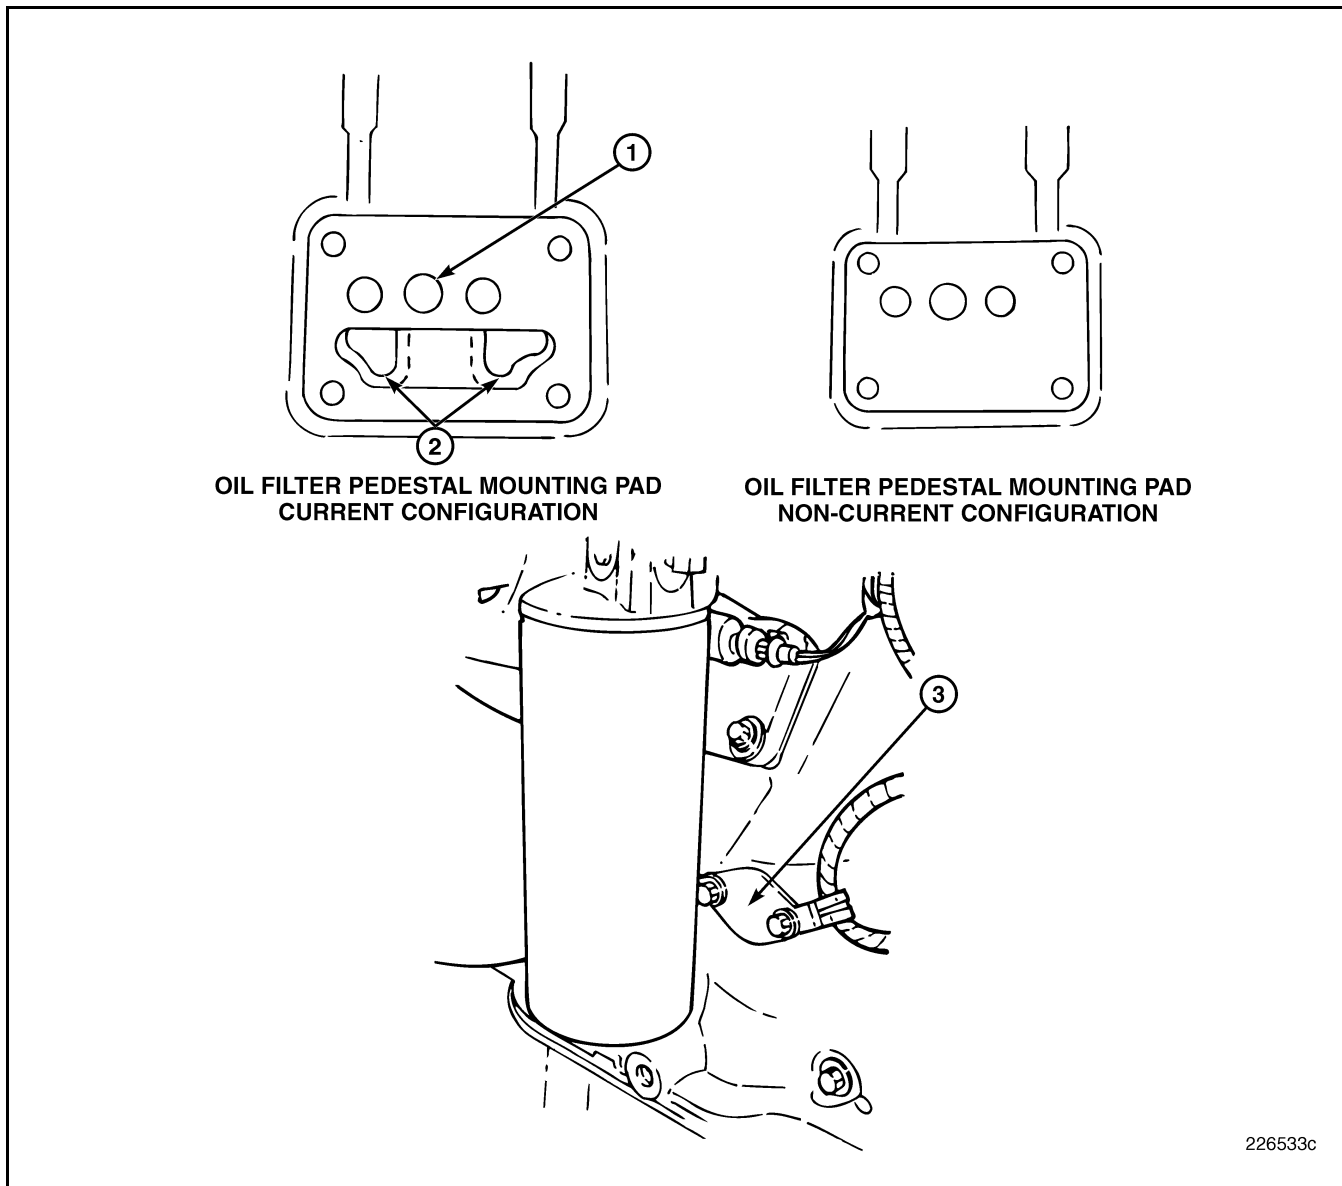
Oil Filter Pedestal Mounting Pad and External Oil Drain Block-Off Plate
